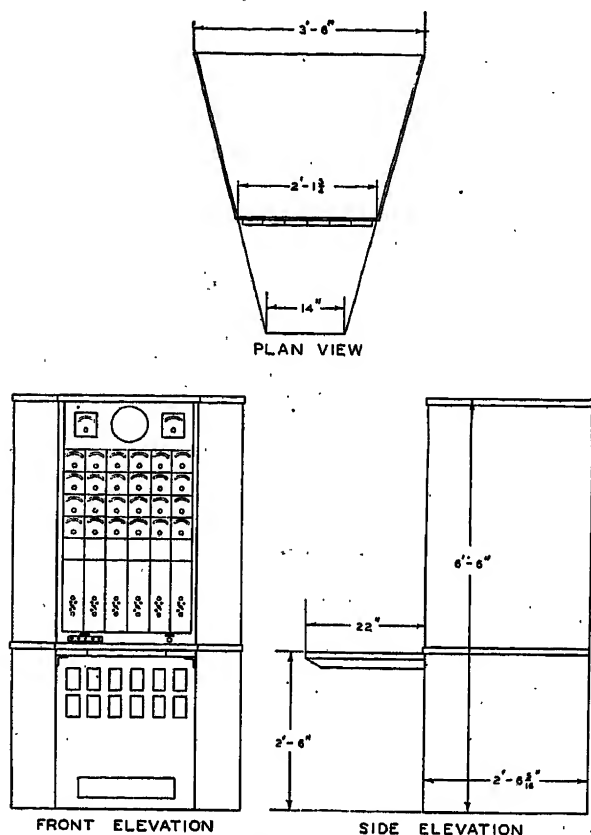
TYPICAL UNIT FOR ZANESVILLE 132-KV. SUBSTATION SWITCHBOARD
